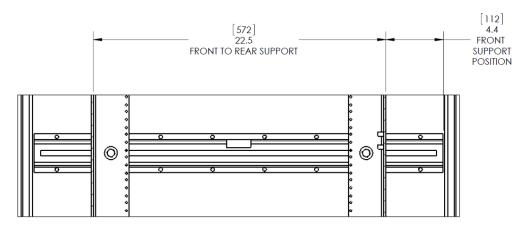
19 INCH RACK POSITIONS INSIDE SPOT/BOSS-BOX ENCLOSURE
